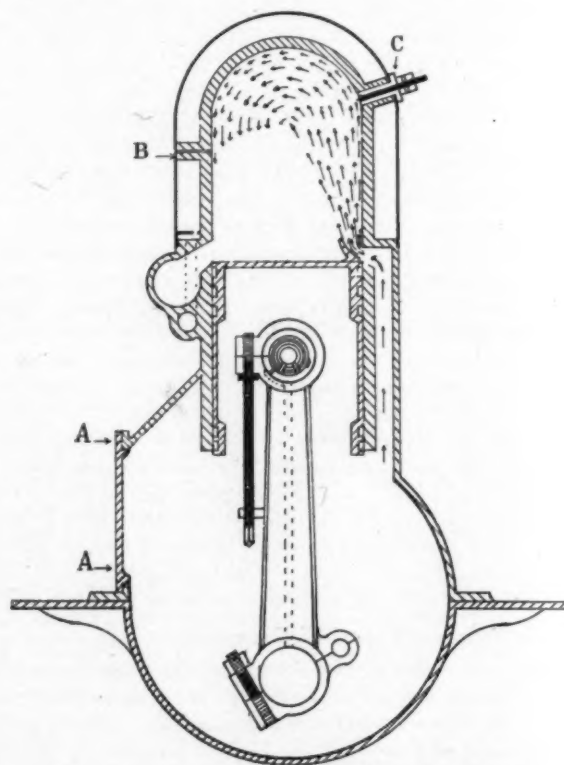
SECTIONAL VIEW OF TWO-CYCLE MOTOR.
